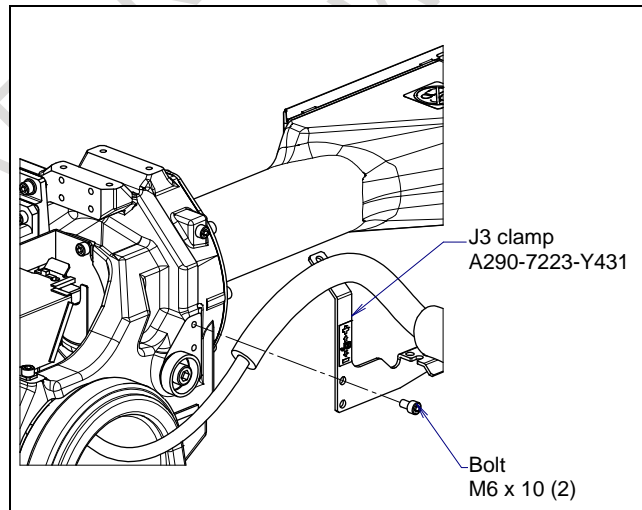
(b) Replacing the cable kit (J3 casing side)
